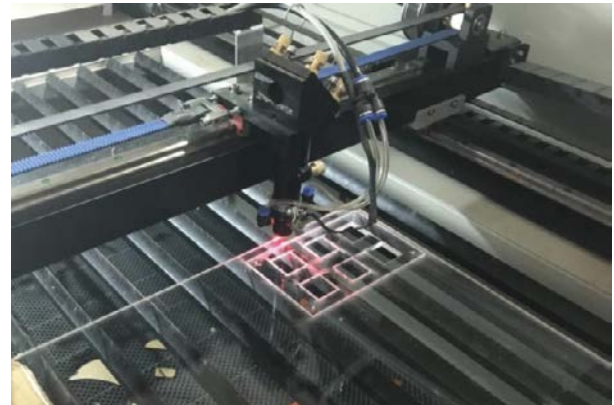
The process of acrylic mold preparation by using Laser engraving cutting machine
